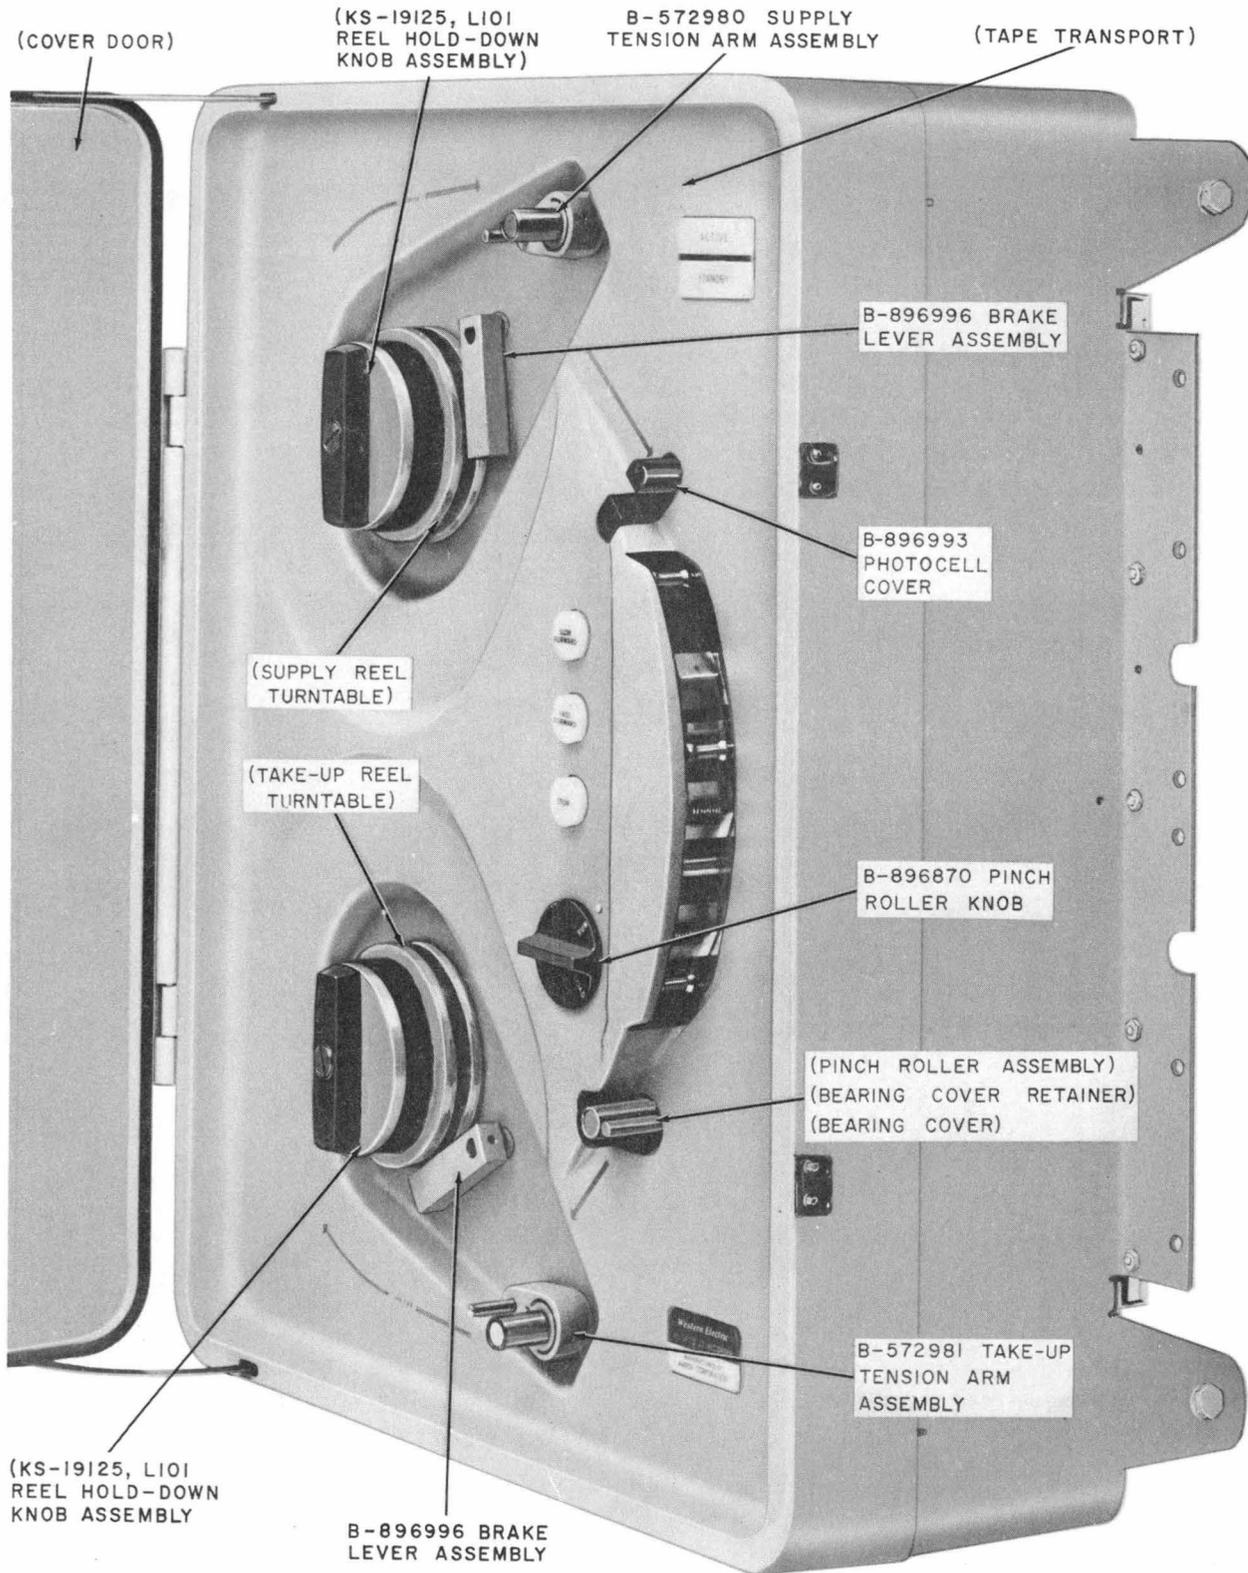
KS-19125, List 2 Recorder Assembly — Front View
